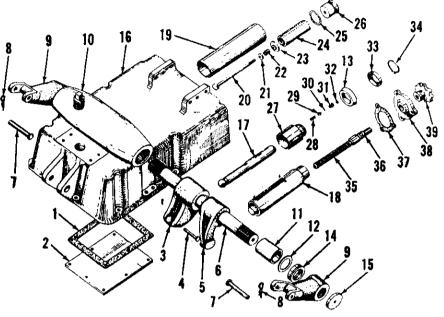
Exploded view of the Series B-275 reservoir, rockshaft and their component parts. Items 28 through 32 comprise the thermal relief valve.
